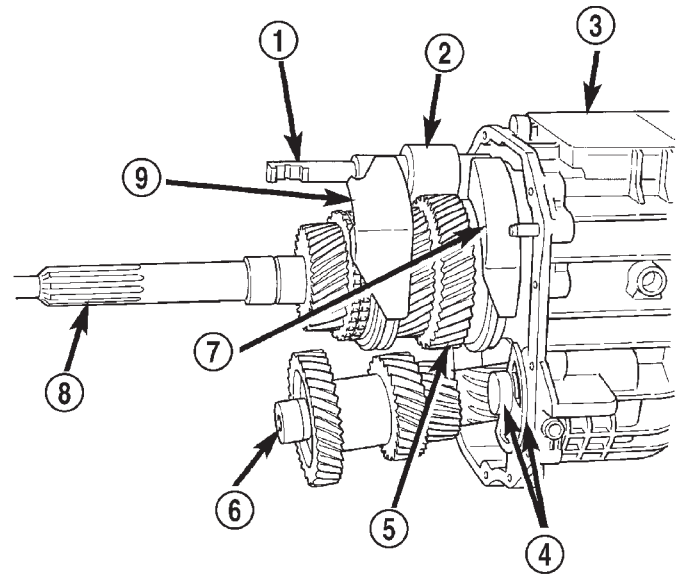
INPUT SHAFT AND COUNTERSHAFT BEARING
